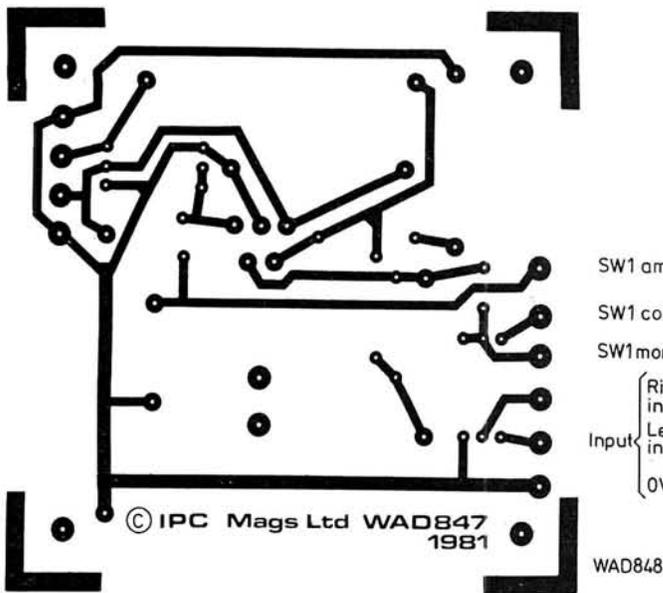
(above): The copper track pattern for the p.c.b. shown full size. Fig. 5 (above right): The component placement drawing for the supplementary car audio amplifier printed circuit board
